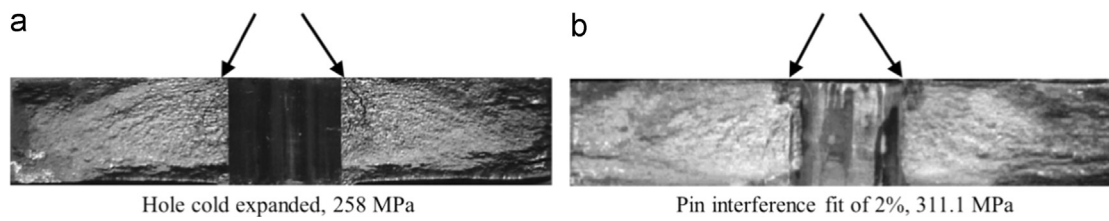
Experimental fatigue crack nucleation location for the hole cold expanded [28] and pin interference fit [2] specimens.
